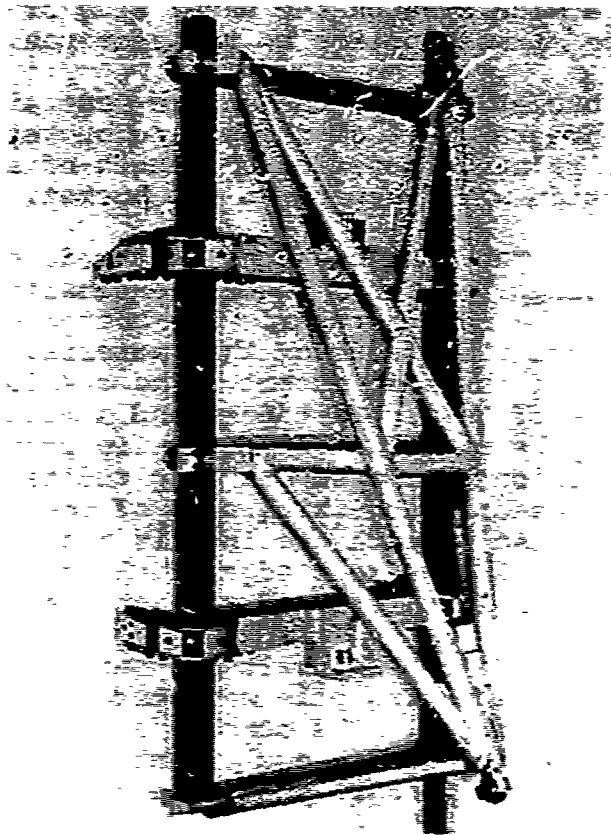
View of Support Structure, Carrier Bearing Assemblies, and Guide Tubes.
